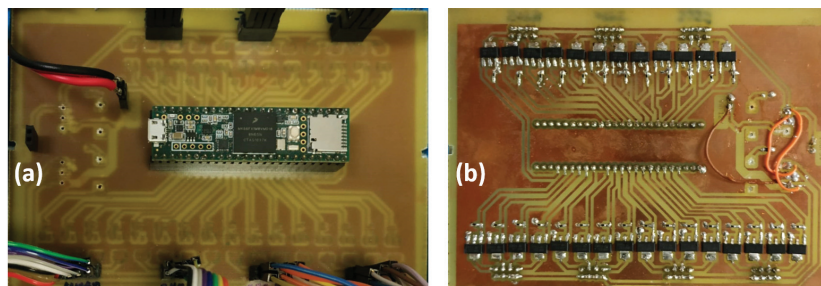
The printed circuit board hosting the arm control electronics: (a) top side with the Teensy 3.6 microcontroller board installed, and (b) bottom side, with the surface-mounted MOSFET drive circuits (28 in total) of the solenoid valves.
